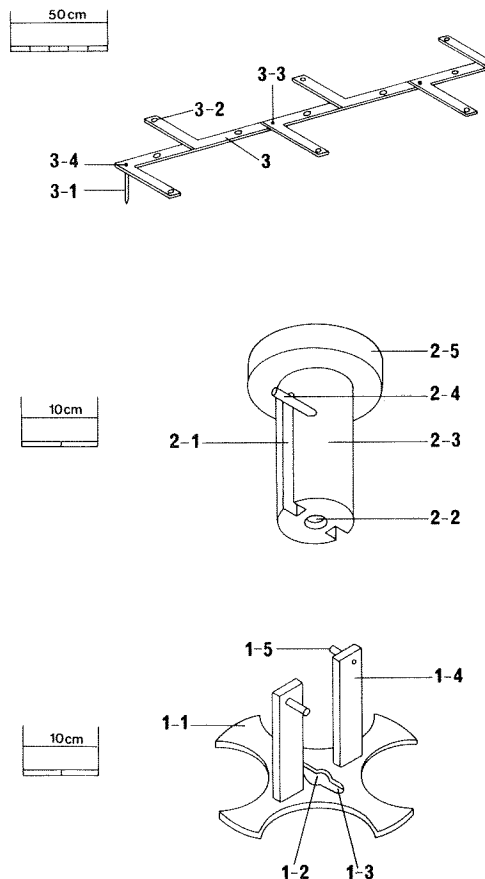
Laboratory-tube sampler: 1-1, base; 1-2, hole; 1-3, bay; 1-4, upright shafts; 1-5, pin; 2-1, furrow; 2-2, hole; 2-3, hand-push piston; 2-4 pin; 2-5, piston head; 3, folding ruler; 3-1, pin; 3-2, hole; 3-3, rivet; 3-4 hole.
